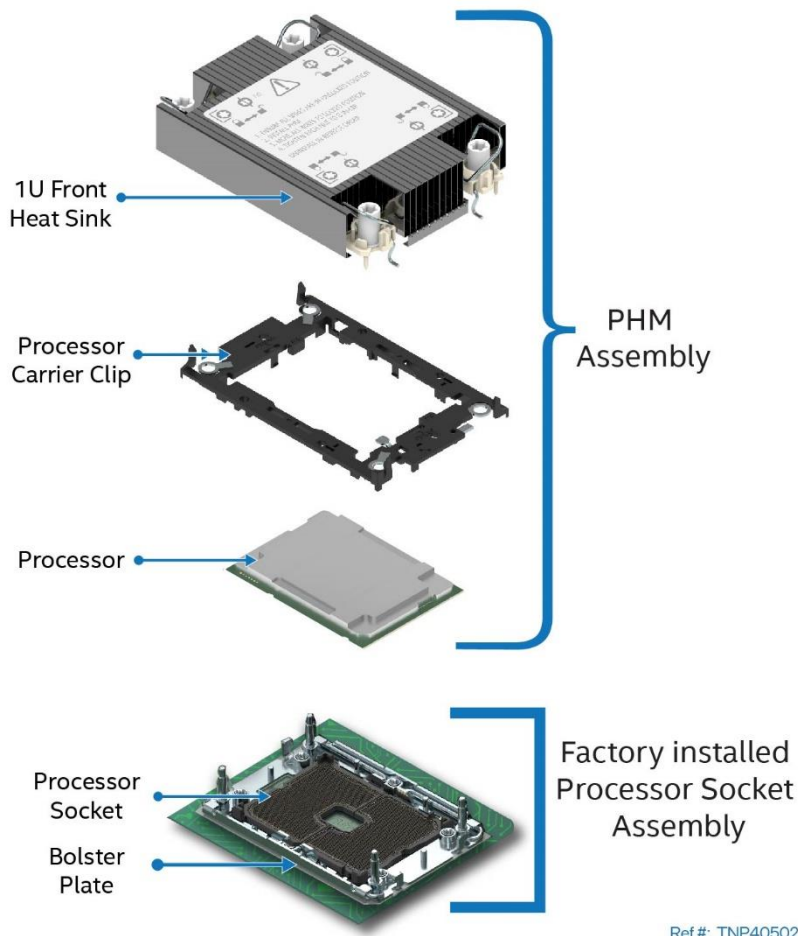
Processor Components and Processor Socket Reference Diagram with Standard Heat Sink
